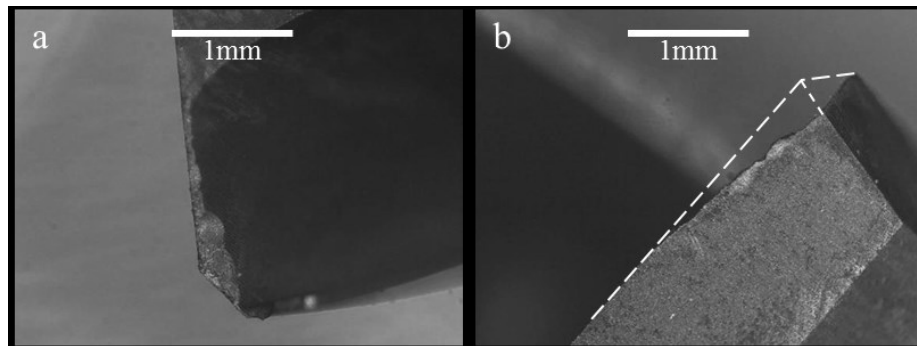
, Microscopic images of (a) crater wear, flaking and (b) chipping of the cutting tool used for experiment 4 at 115m/min, 0.03mm/tooth and 3mm in flood cooling.
